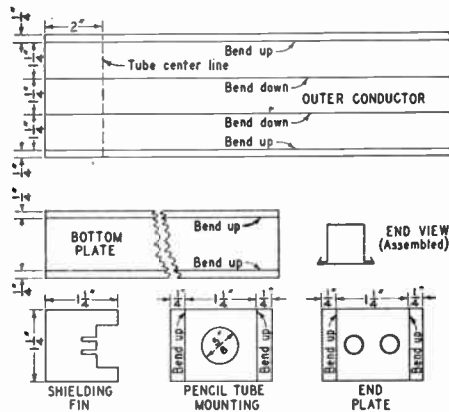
Flashing copper parts of the 420-Mc. tank circuit. The outer conductor (top sketch) is 10 inches long for the line using miniature tubes, or 12 inches for the pencil tube model. The middle drawing shows the bottom plate (left) and an end view of the assembled line. At the bottom left is the shielding fin used with the miniature tubes, and at the middle is one of the two plates needed for mounting the pencil tube. These plates should be tailored to fit the line assembly after it is bent up. They are soldered in place, two inches from the end of the trough. The right-hand plate is fastened in the end of the trough, the two holes being for the heater by-passes, C_2 and C_3 .
